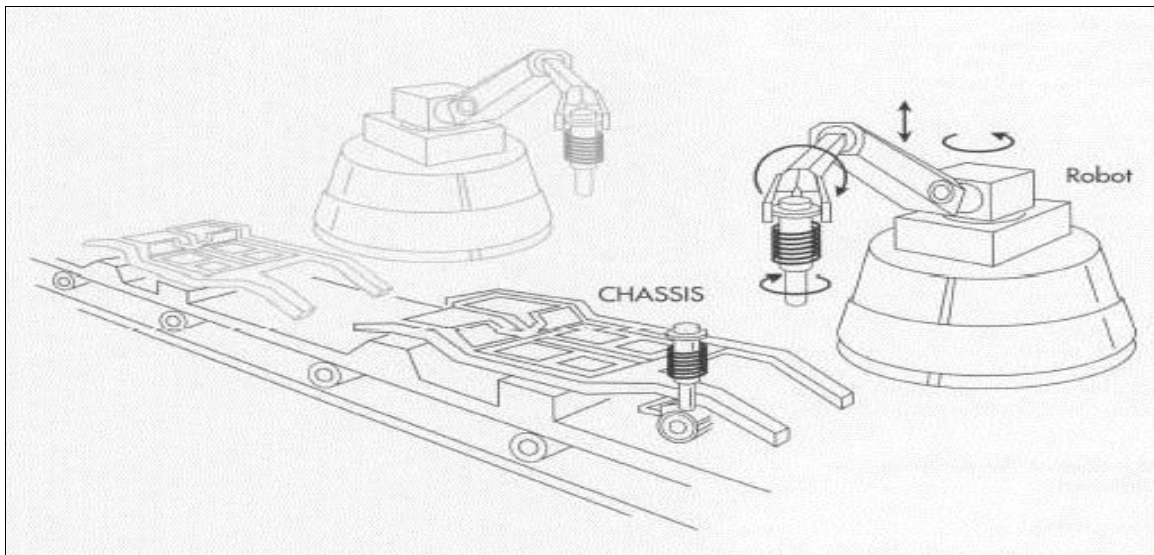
Assembly line robot carrying out welding and placing components onto the chassis
